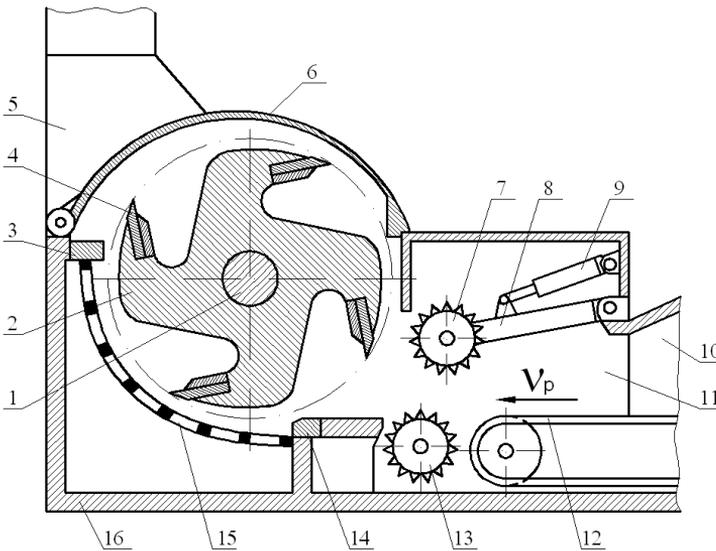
Drum chipper working unit: 1 - shaft, 2 - drum, 3 - upper counter knife, 4 - cutting knife, 5 - chips collector, 6 - cover, 7 - upper feed roller, 8 - rocker arm, 9 - hydraulic cylinder, 10 - feed chute, 11 - inlet, 12 - conveyor, 13 - lower feed roller, 14 - lower counter knife, 15 - sieve, 16 - body (Gendek and Więsik, 2015).
